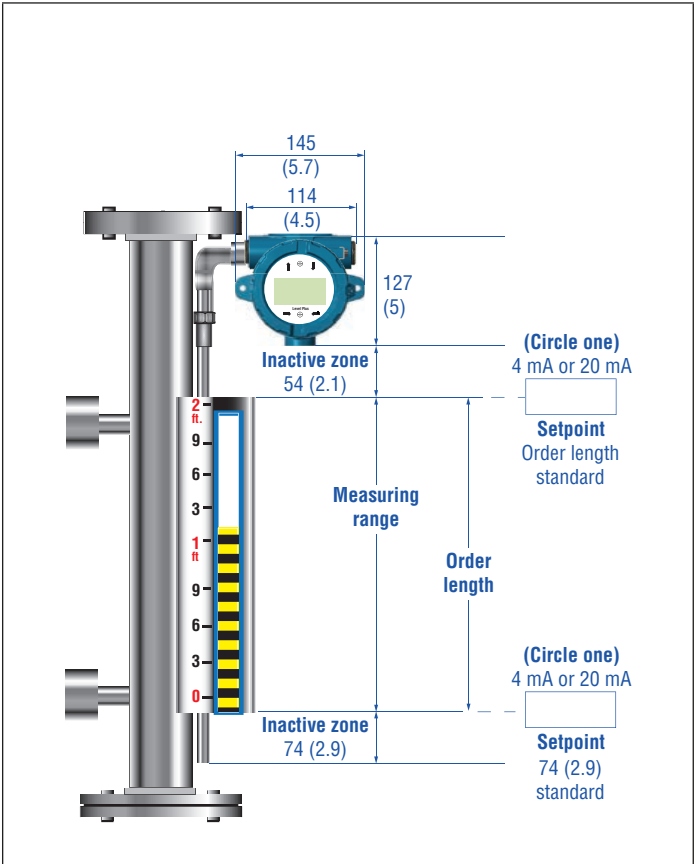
CHAMBERED mounting, top and bottom flange ¹
